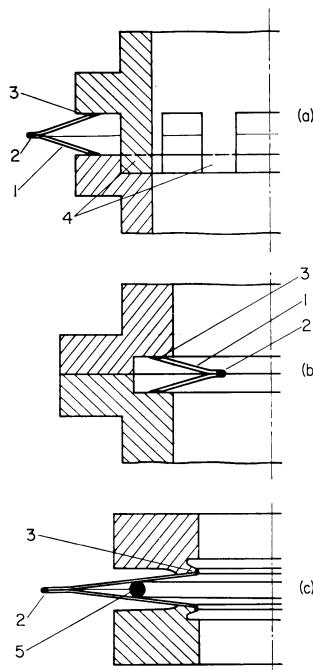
Vacuum sealing by edge welding of thin metal sheets: (1) seal ring; (2) seal weld; (3) base weld; (4) lug; (5) ring (after Michelson⁸⁵⁵ and Farkass³⁶⁹)
